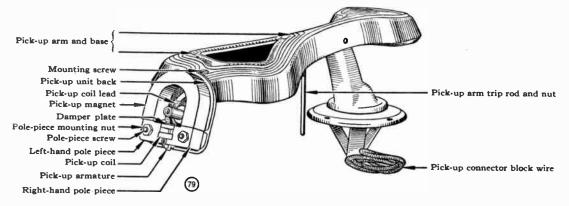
Drawing of Phonograph Pick-up and Arm Used in Model 75.
